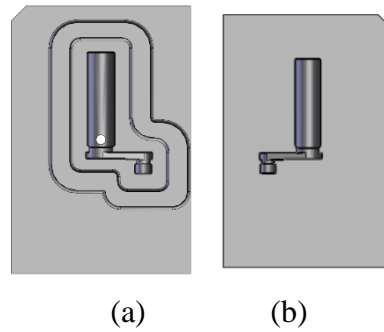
Crank final forging die (a) upper die, (b) lower die
